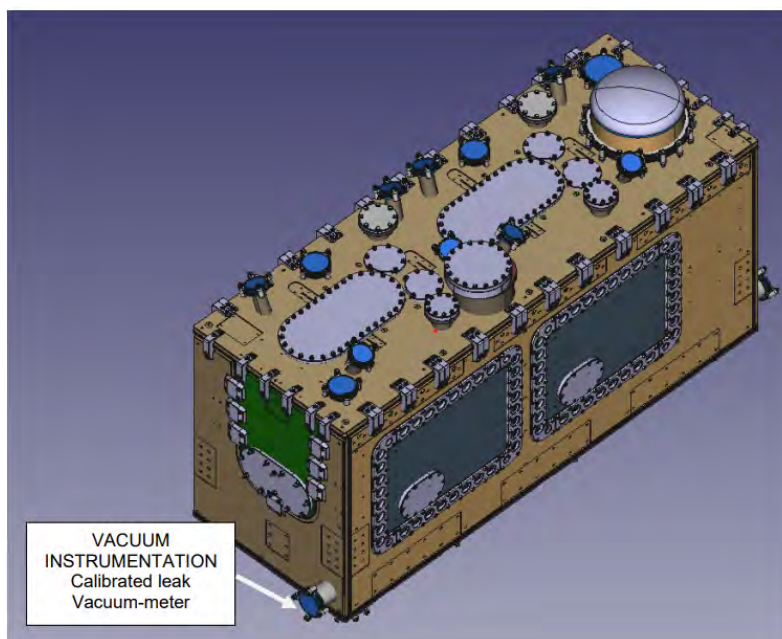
Pump mounting system (Sistema di fissaggio delle pompe) 2
